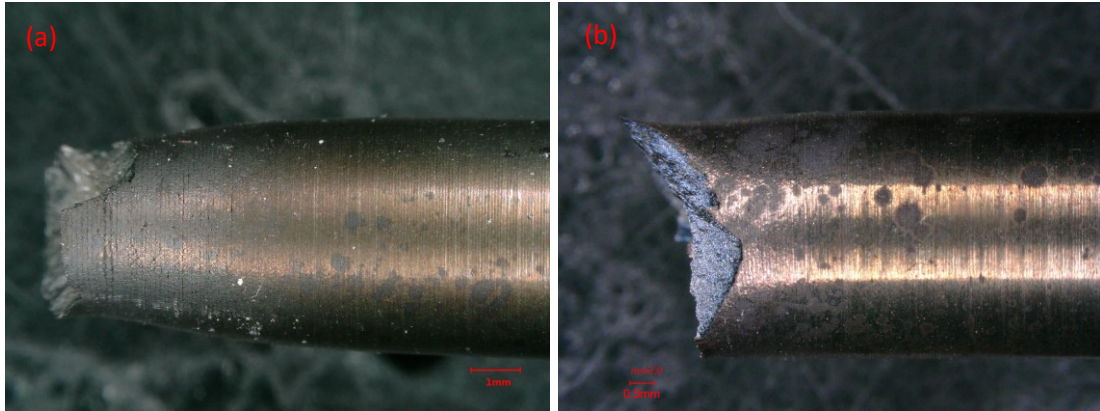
The necking sections close to the fracture surface of (a) HT2P and (b) HT3P samples.
